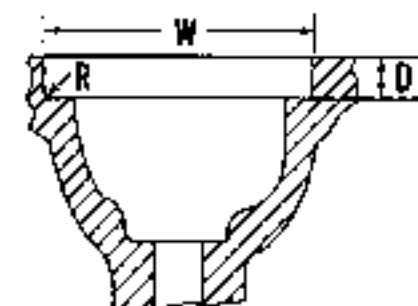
Machining dimensions for installing as-bored valve seat inserts available for some engines.
